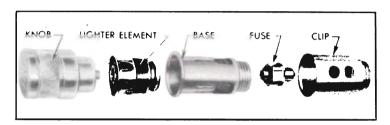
Cigar Lighter, Disassembled—1949 Series 50-70
